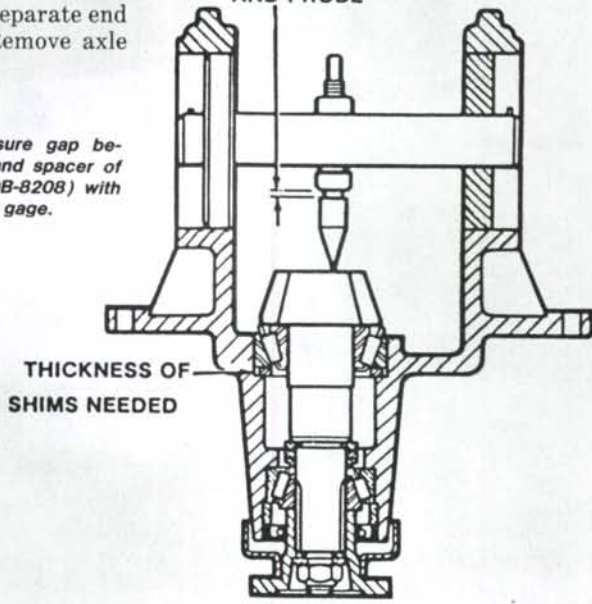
Measure gap between probe and spacer of special tool (DB-8208) with a feeler gage.
